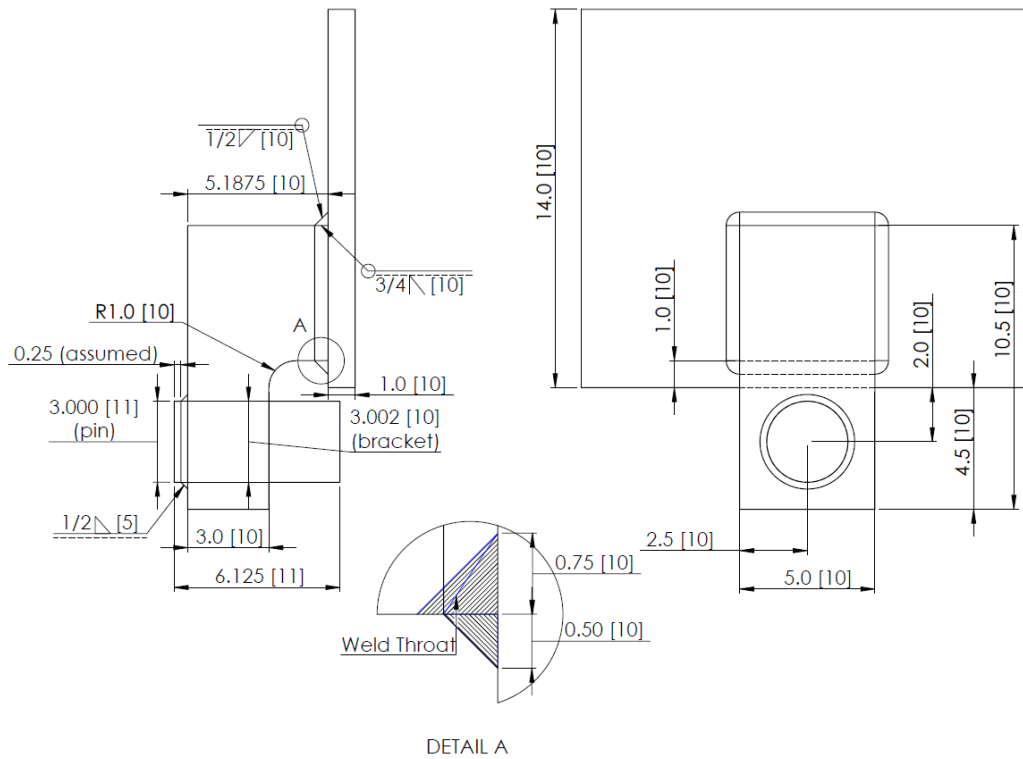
Dimensions of Aligner Pin and Bracket Assembly
